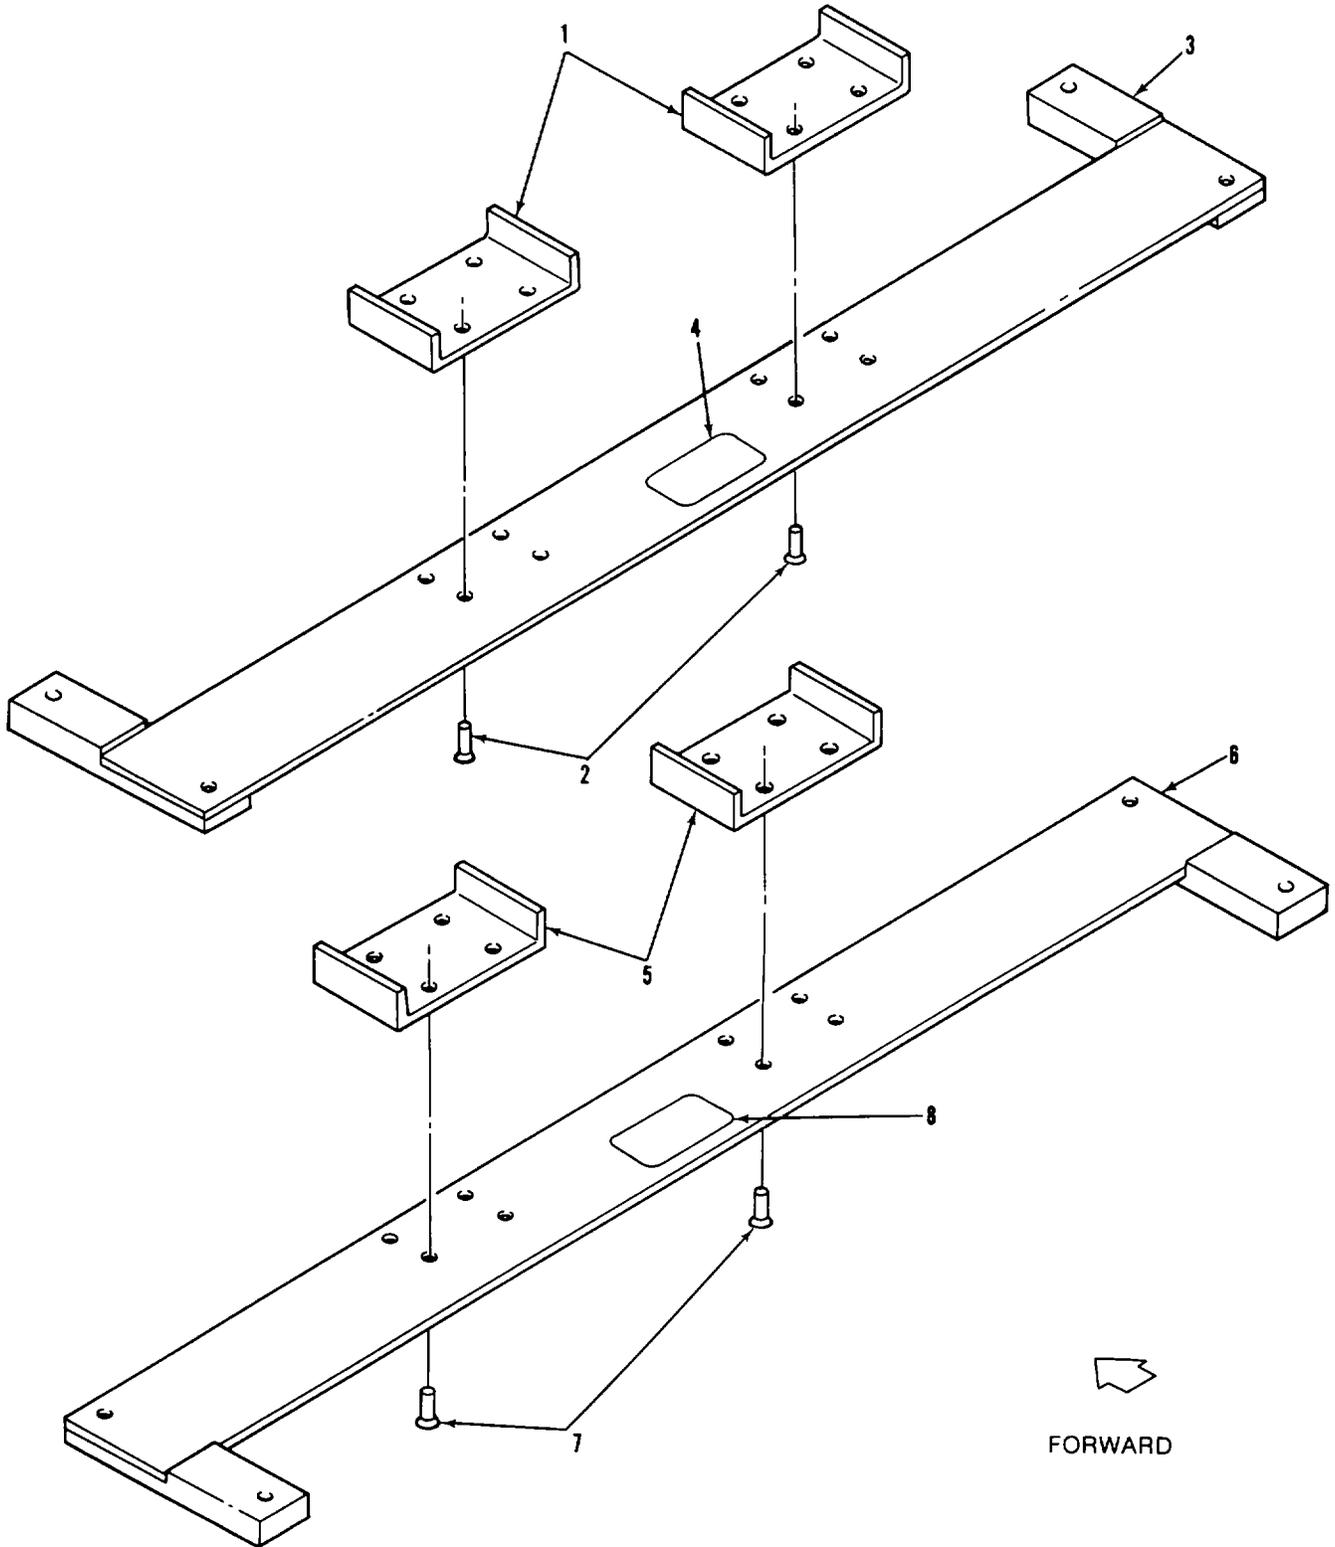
Forward and Aft Ramp Center Roller Mounting Bar Assembly
